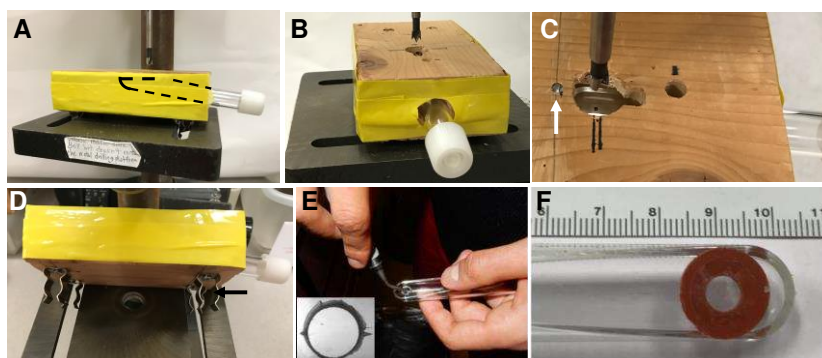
Preparation of the roller culture tubes. A) Front view of roller tube inserted in a jig on a drill press for drilling out the 6 mm hole in the tube. Dashed line shows position of the flat sided roller tube in the jig. B) End view of jig with tube inserted and drill bit aligned over hole. C) Top view of hole in jig for drilling out roller tubes with 6 mm drill bit. White arrow shows position of cut-off nail inserted as a stop for positioning tubes and black double lines are for bit alignment. D) Spring clips (black arrow) installed on bottom of jig to securely hold it in position when drilling tubes. E) After drilling out hole, edges are smoothed with a deburring tool and grooves are cut on the inner side of the hole (inset shows hole viewed through a dissection microscope) to enhance medium draining from the hole during tube rotation. F) Culture tube with hole aligned to one in the silicone rubber adhesive to which the coverslip will be attached.
